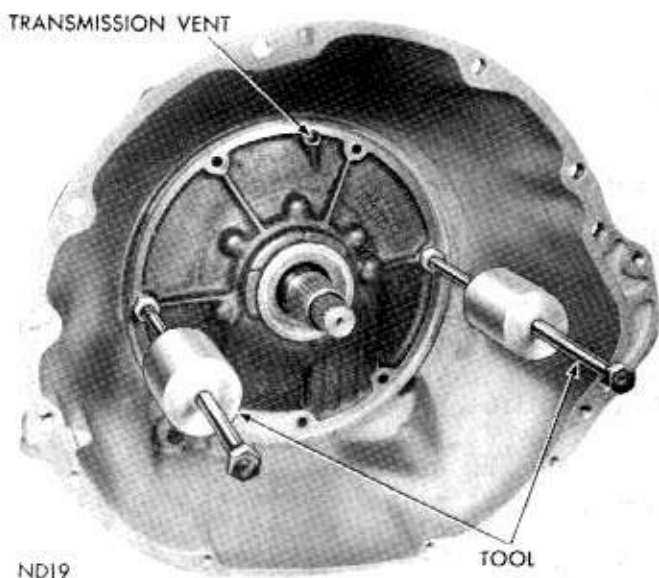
Removing Pump and Reaction Shaft Support Assembly
